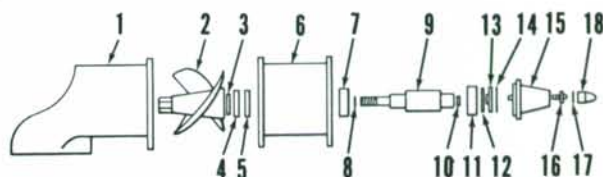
Exploded view showing correct arrangement of jet pump components on JS550 models.
